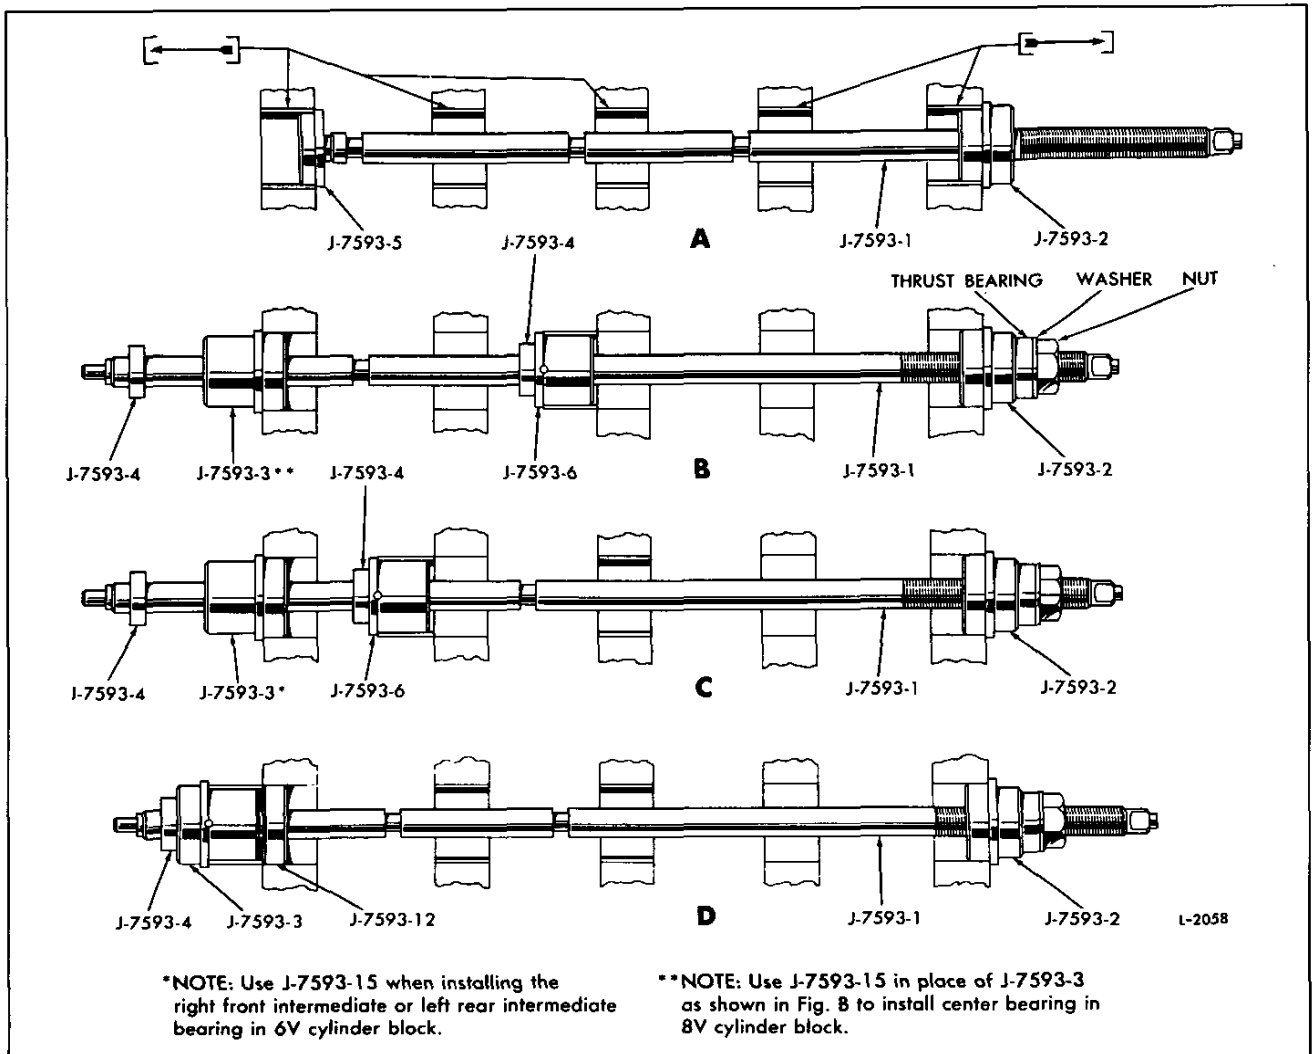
Removing and Replacing Camshaft or Balance Shaft Bearings with Tool Set J 7593-03
